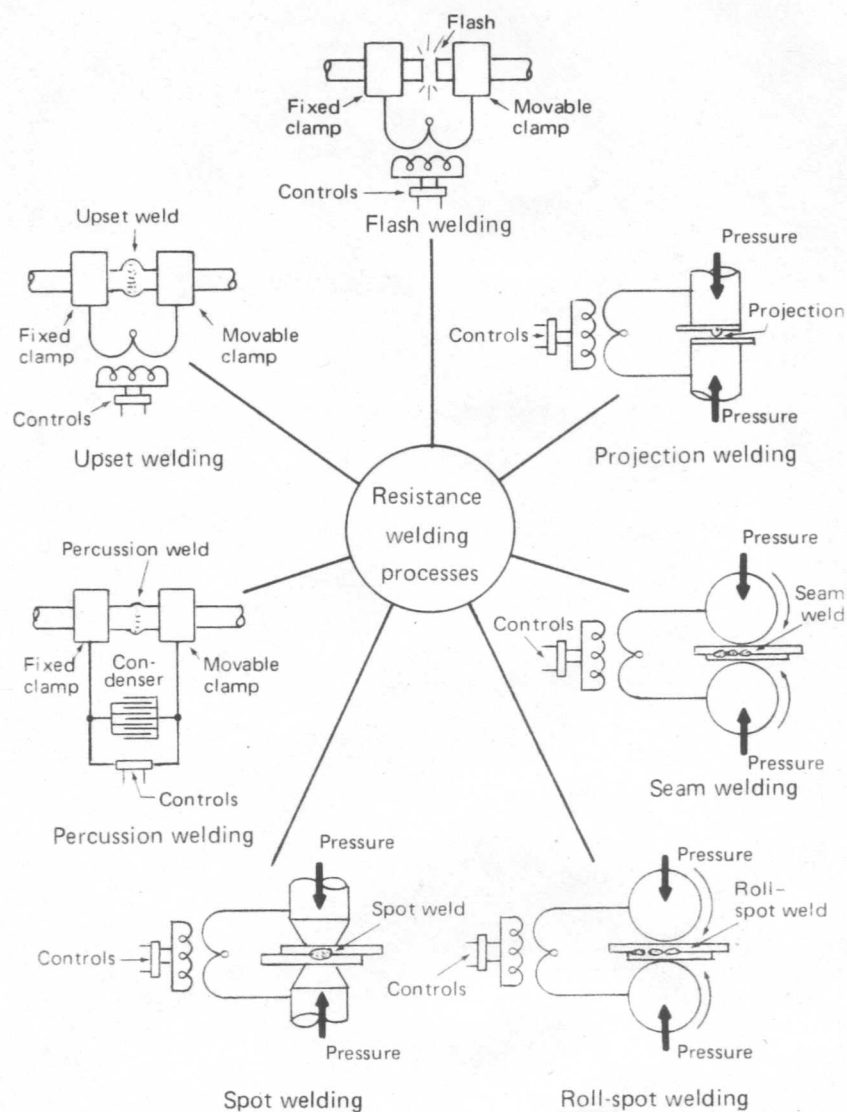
The resistance-welding processes. (Redrawn from *Welding Engineering* by Boniface E. Rossi. Copyright 1954 McGraw-Hill Book Company. Used with permission of McGraw-Hill Book Company.)
